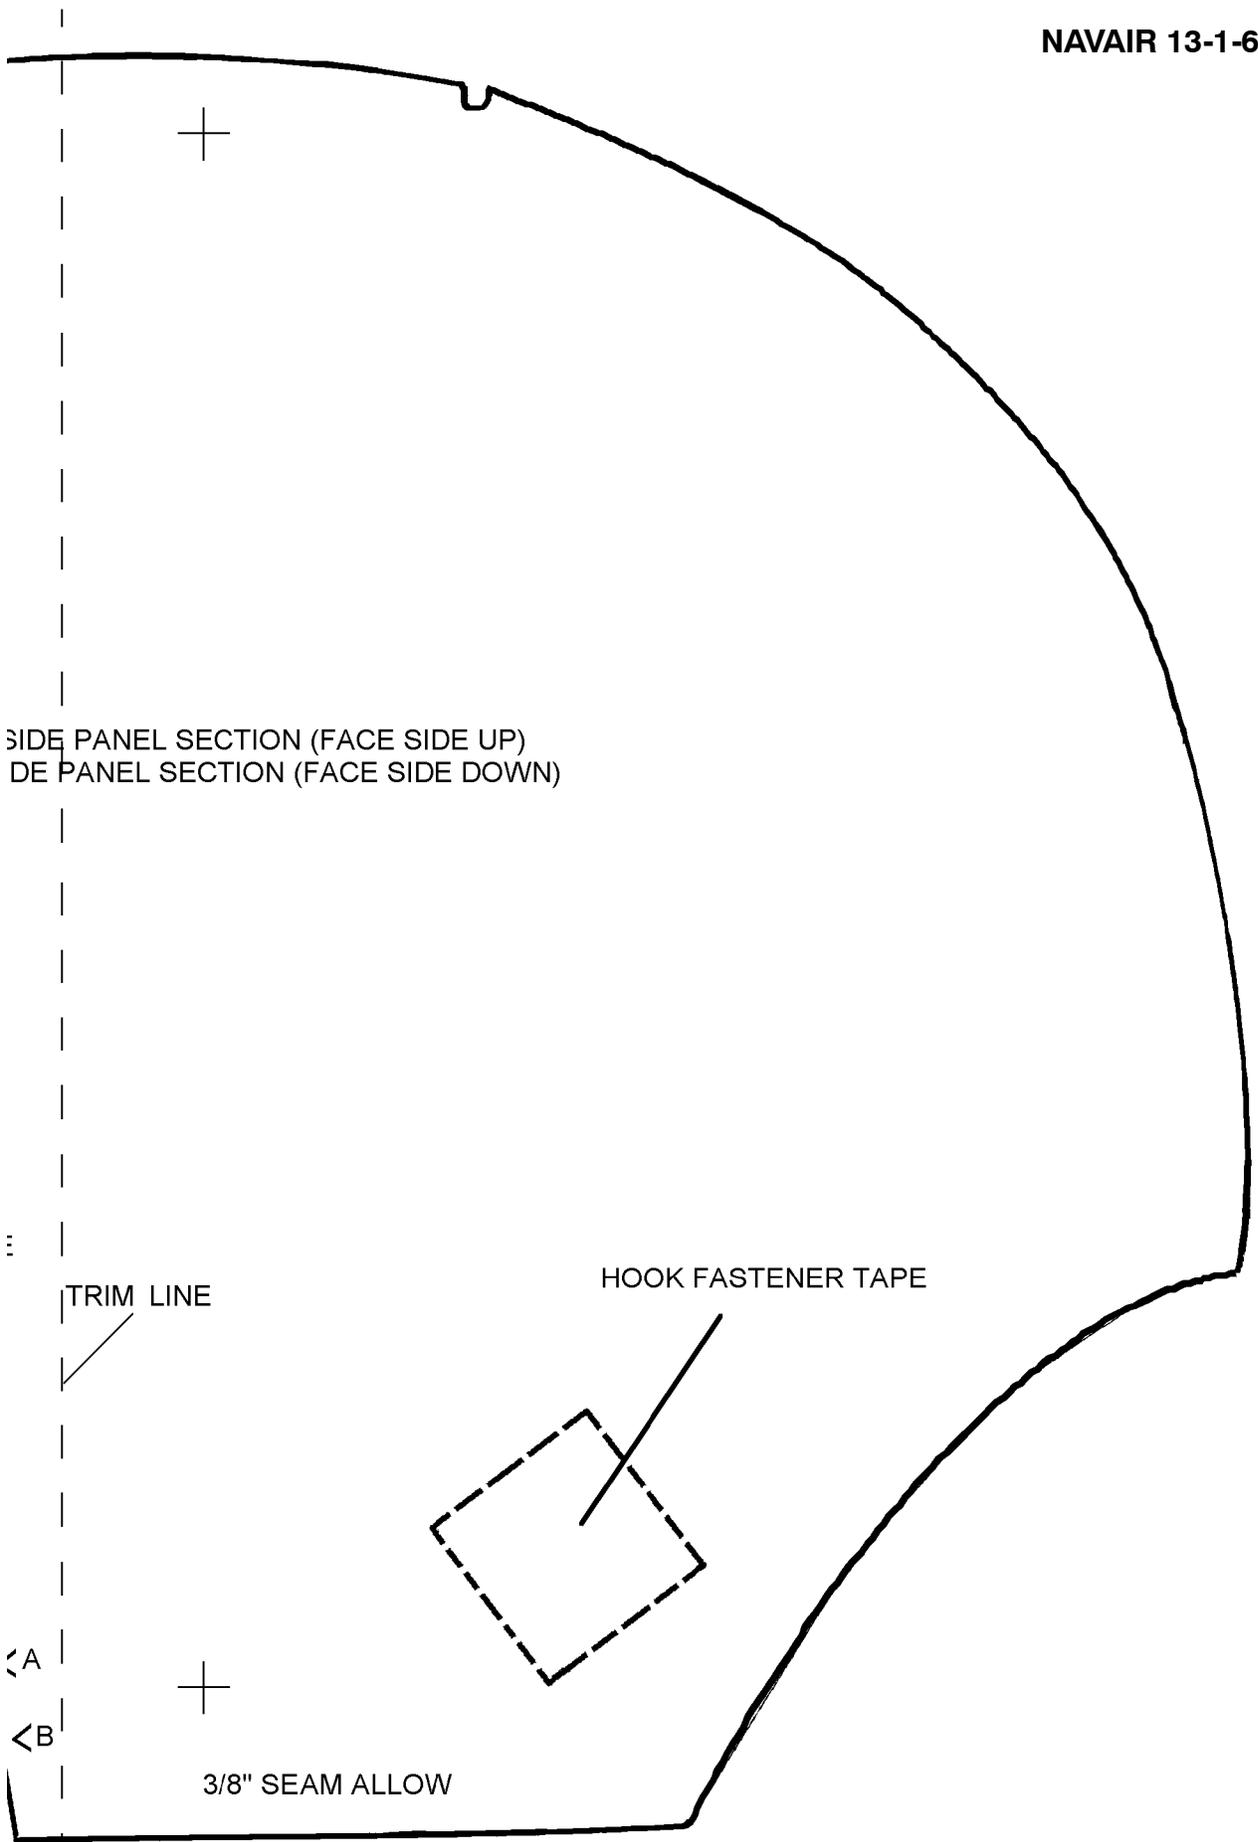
Removable Camouflage Helmet Cover (Large) (3 of 5)
